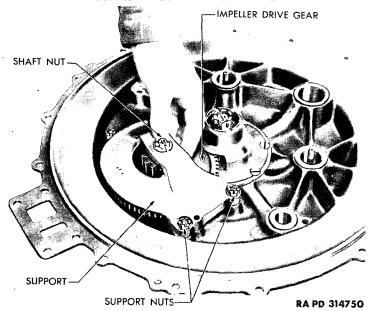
Checking End Play in Impeller Drive Gear Shaft
